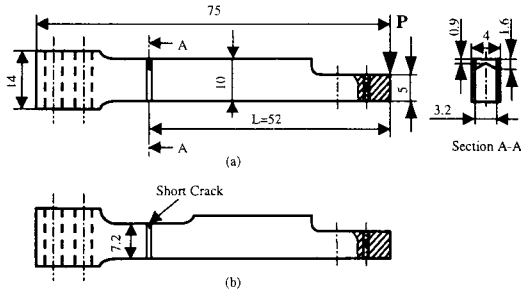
Specimen configurations of (a) prior to precracking and (b) precracked short crack specimen.
